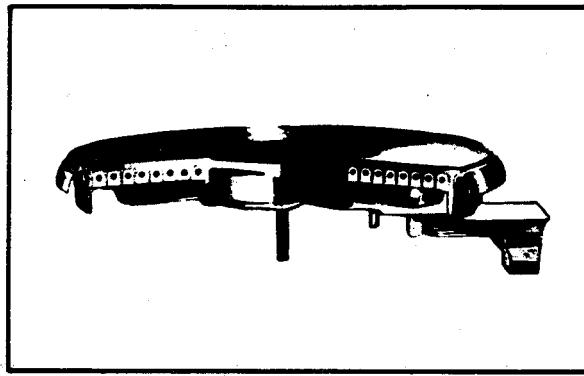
section of six-heat high-speed sealed hotplate with built-in protector
